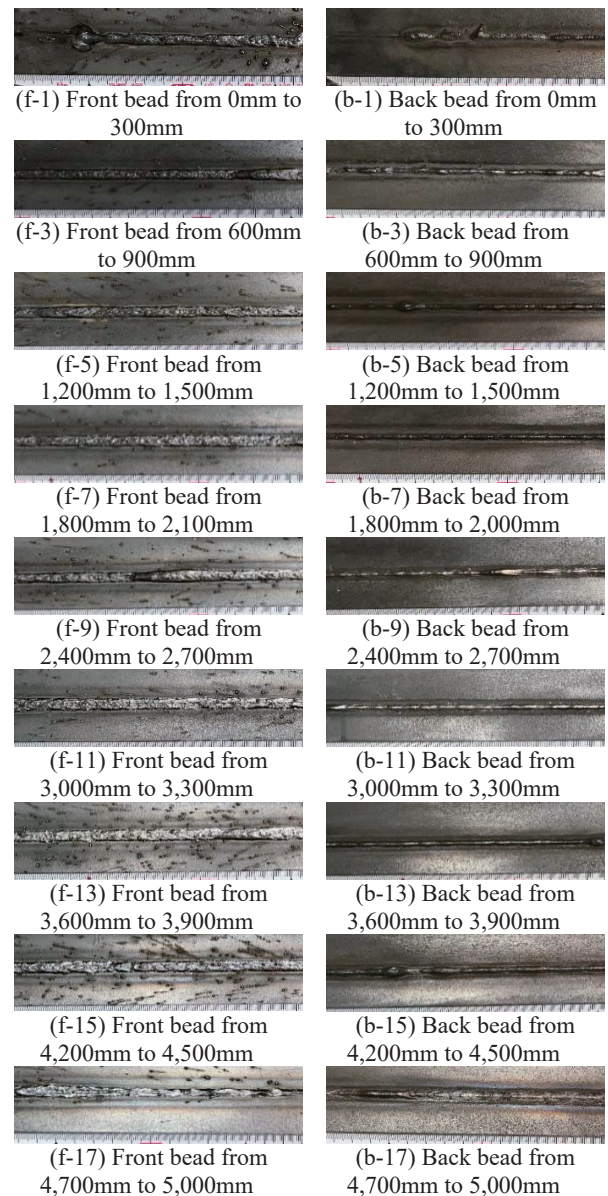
Weld bead appearance of butt welded joint. (Initial gap 0.2mm).
